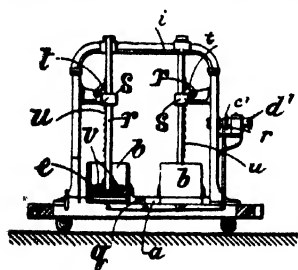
Modified form of Combined Vibrating and Stamp-action Power Tea Packing Machine (front elevation).
